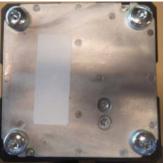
Apply the screw locking paint over the entire surface of the screw thread.
